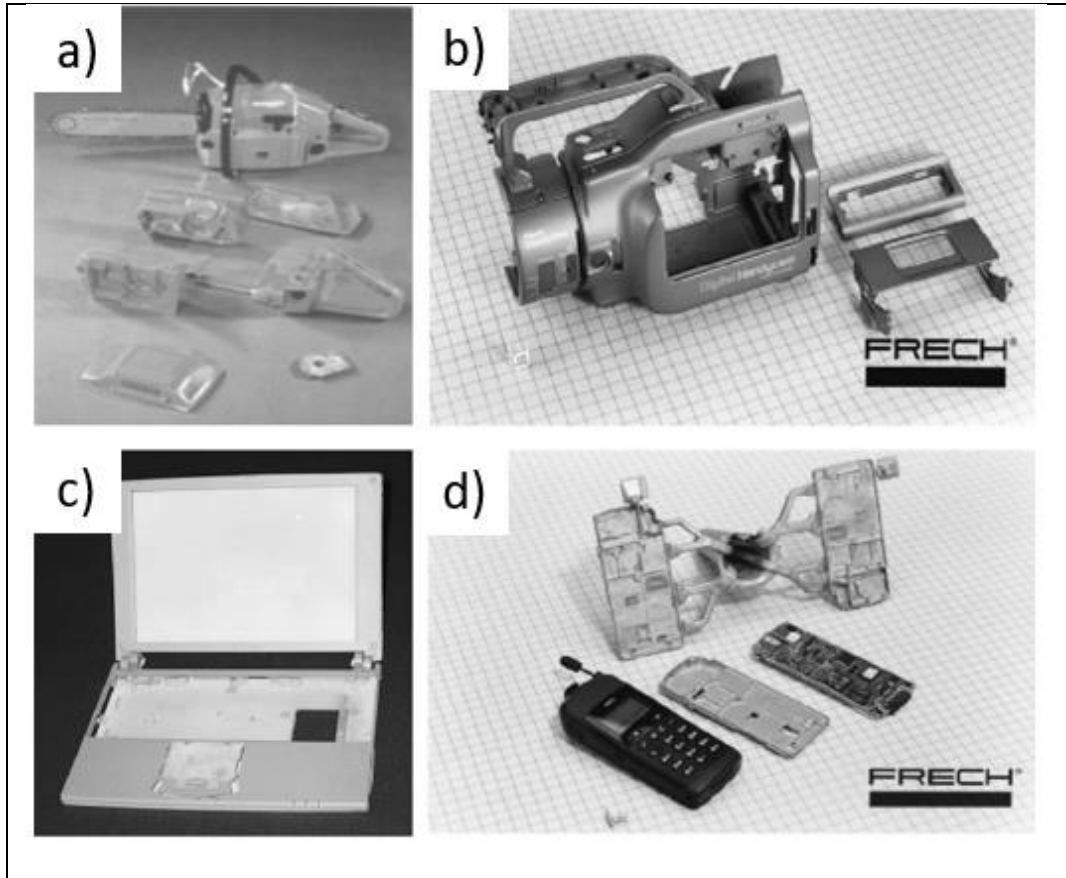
Magnesium electronic parts a) Saw, b) Camera, c) Laptop and d) Mobile phone [1].
